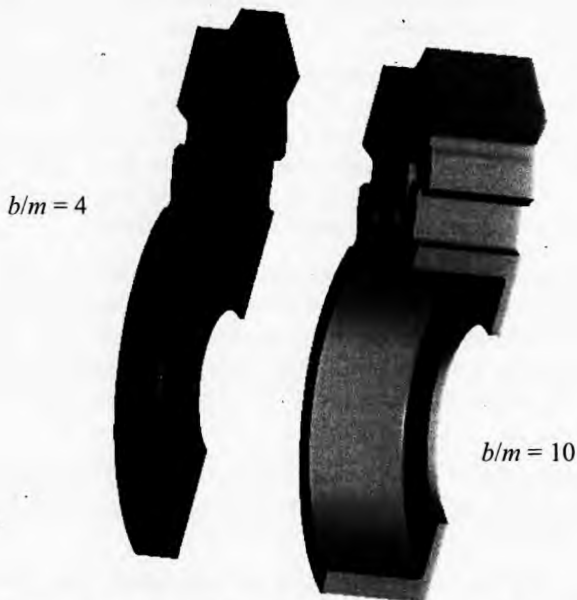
The pinion-wheel model (one half) of narrow and wide faced thin-rimmed gear
